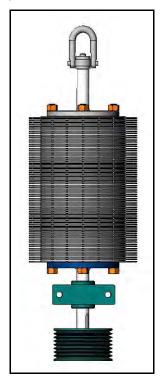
Hoist Ring (2504720) Installed & Blade Shaft Assembly Upright on Drive Sheave
